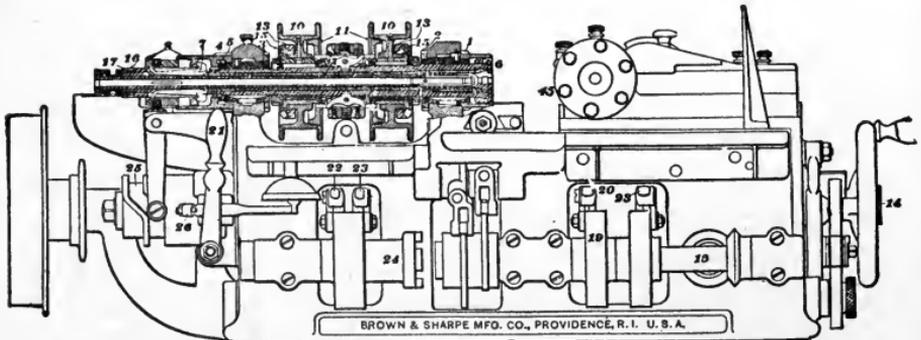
Front Elevation of Brown and Sharpe Automatic Screw Machine, Showing Section through Spindle
